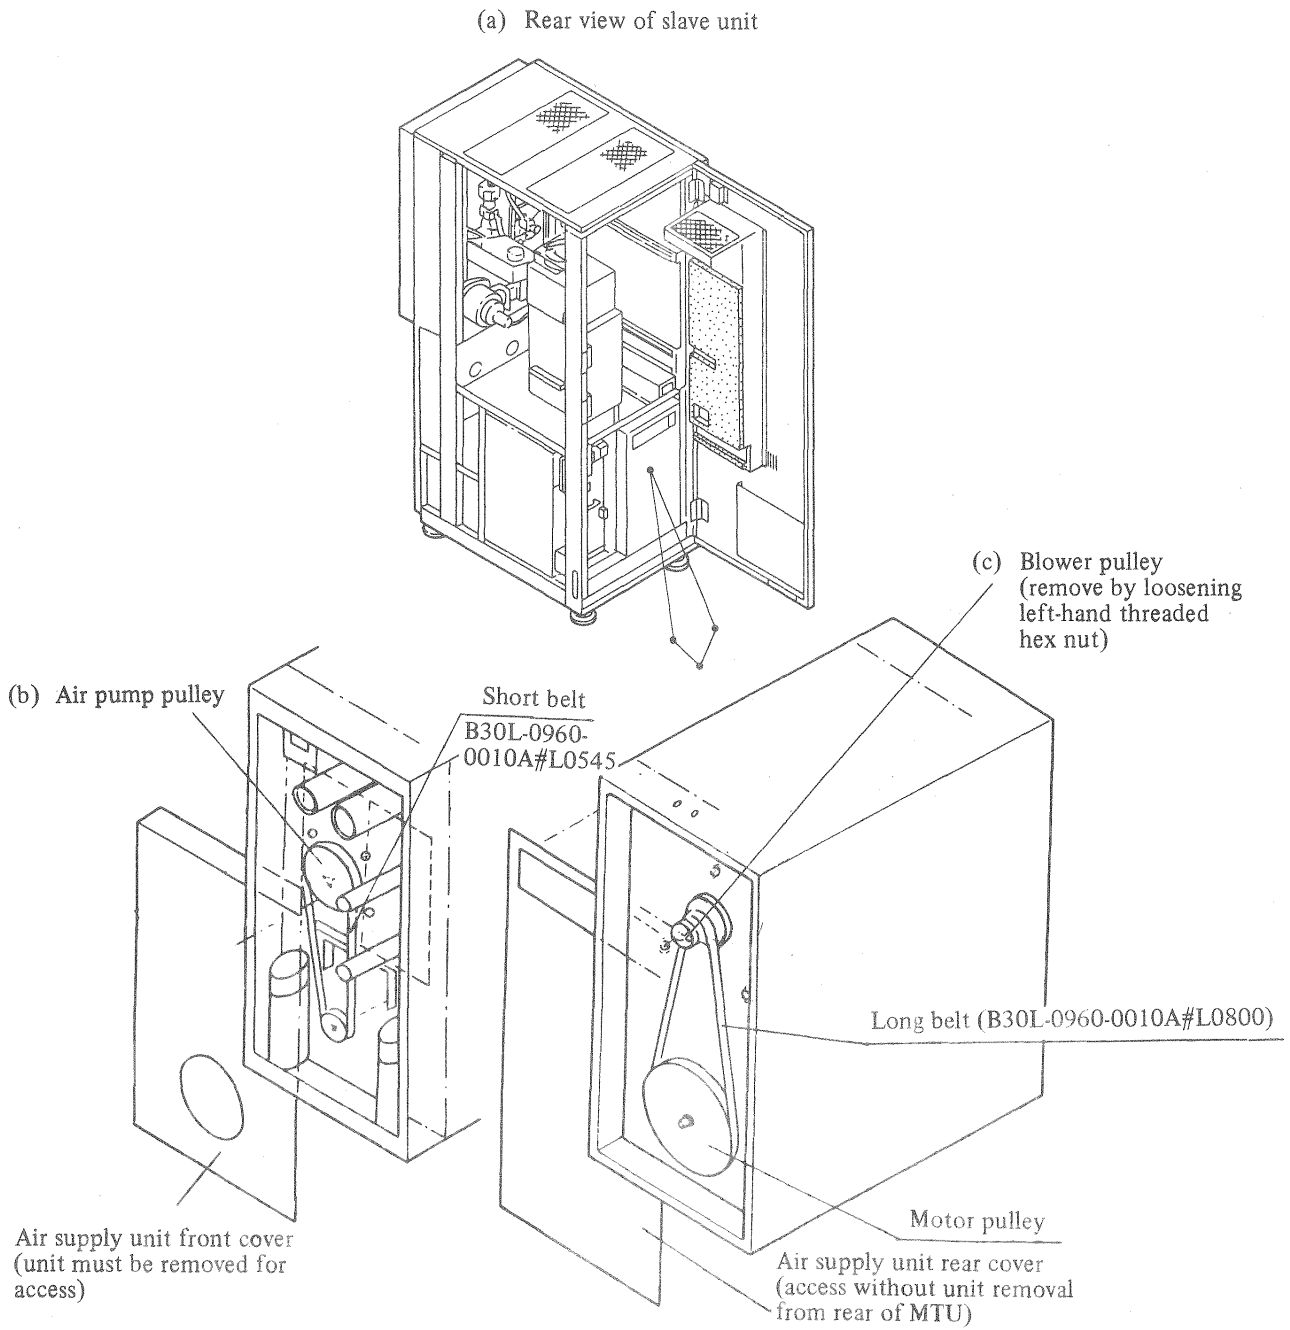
Air supply unit: vacuum blower and motor pulleys (1/2)
